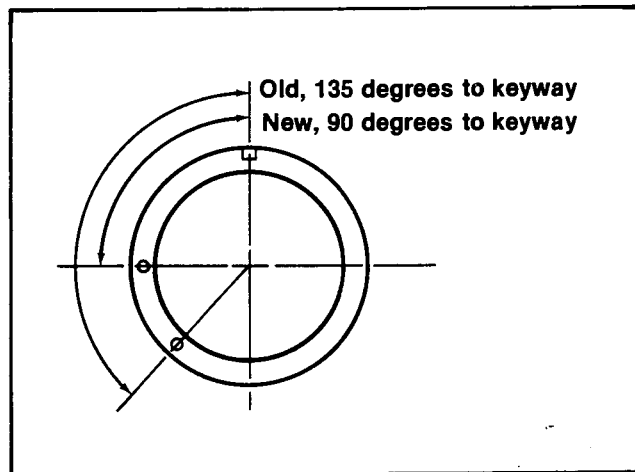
Crank Pin and Gear Shaft Oil Holes (1200cc/1340cc)
